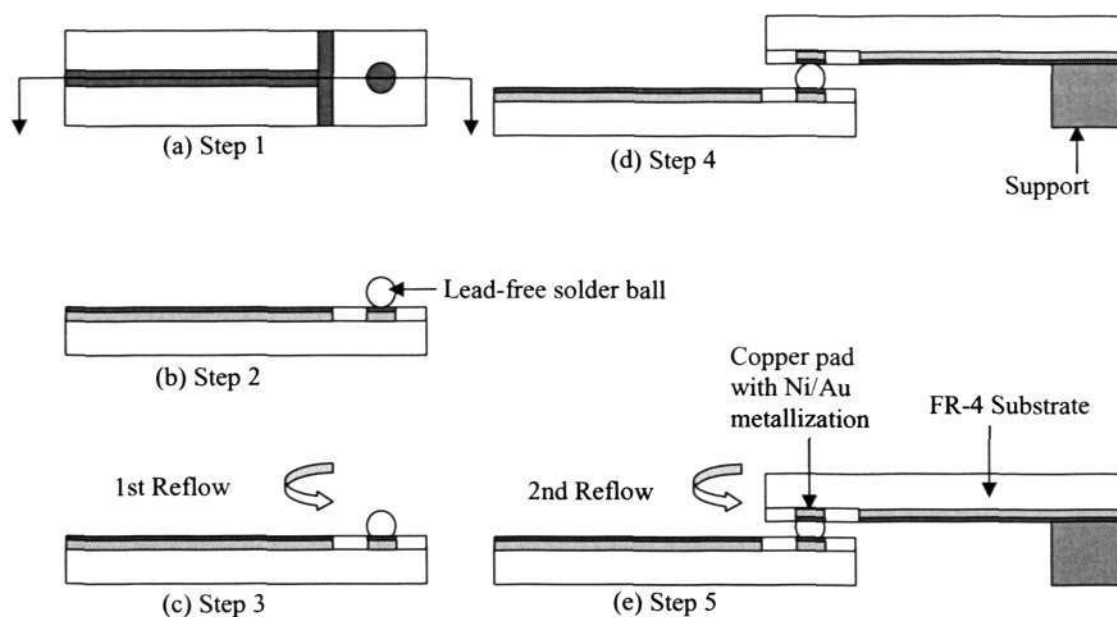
Schematic diagram showing fabrication process of FR4-solder joint specimen. (a) The FR4-substrate was sectioned into smaller pieces. (b) Solder was placed and secured on the Cu pad coated with Ni/Au with no-clean flux. (c) The FR4-substrate with solder ball attached was subjected to the first time reflow. (d) The other FR4-substrate was aligned to the reflowed solder. (e) The FR4-solder joint specimen was formed through the second reflow.
